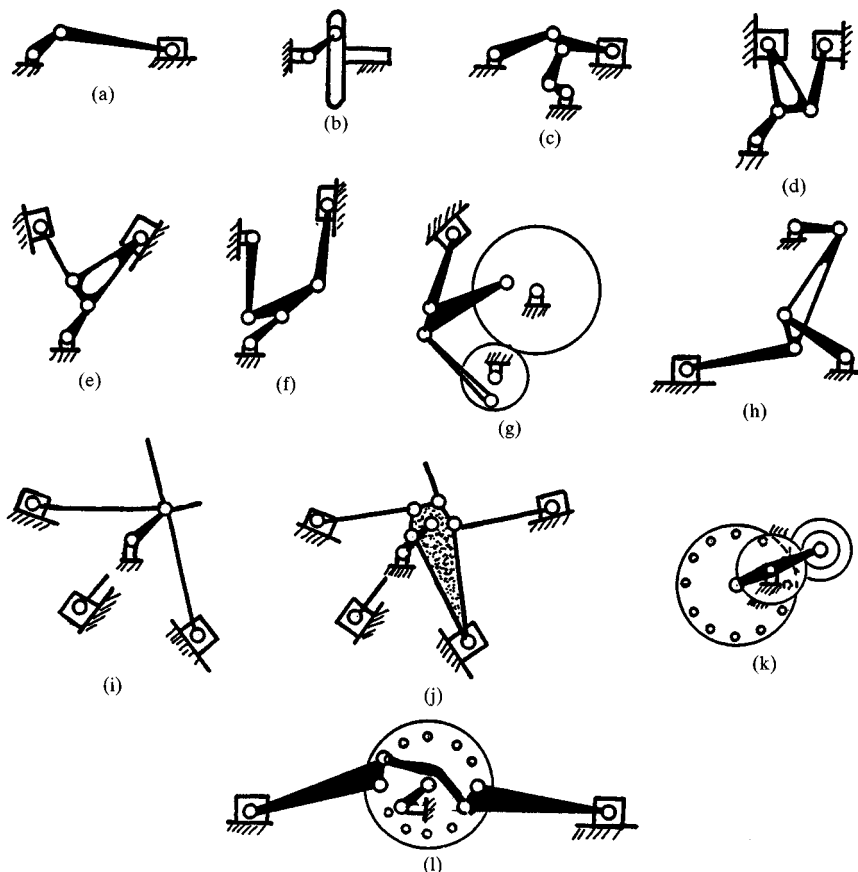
Reciprocating mechanisms I. These mechanical devices cause a member to translate on a straight line. (a) Slider crank; (b) Scotch yoke; (c) toggle mechanism; (d) Zoller engine; (e) V engine; (f) double-stroke engine; (g) geared engine; (h) Atkinson gas engine; (i) ideal radial engine; (j) practical radial engine; (k) geared Nordberg radial engine; (l) linked Nordberg radial engine.
